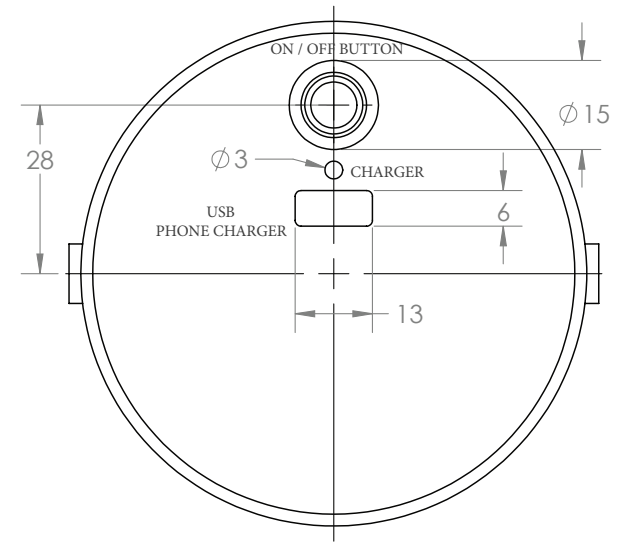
(B) OPTION - 2 MECHANICAL DRAWING
